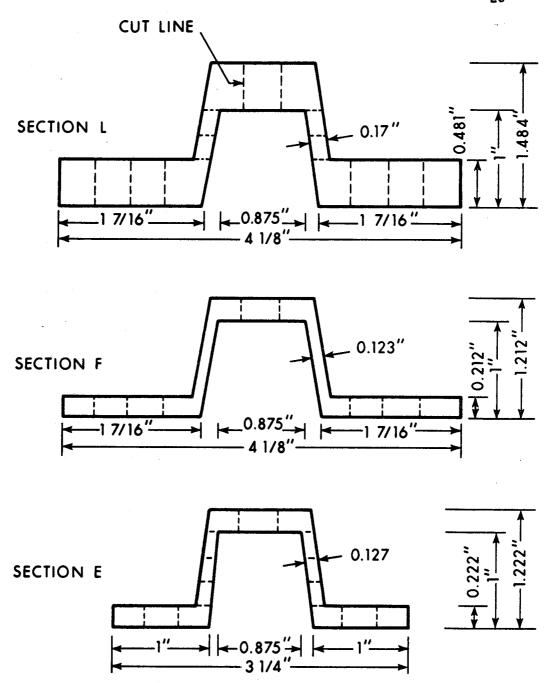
SECTIONS E, F AND L - DIMENSIONS TAKEN FROM MANUFACTURERS CATALOGUE
